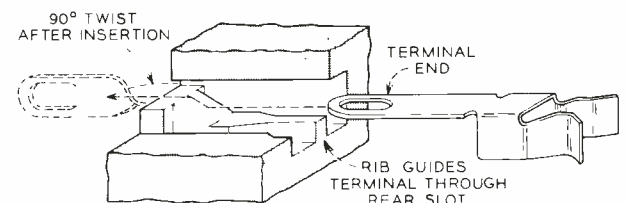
Sloped rib in jack cavity guides terminal during automatic insertion process of manufacture.
